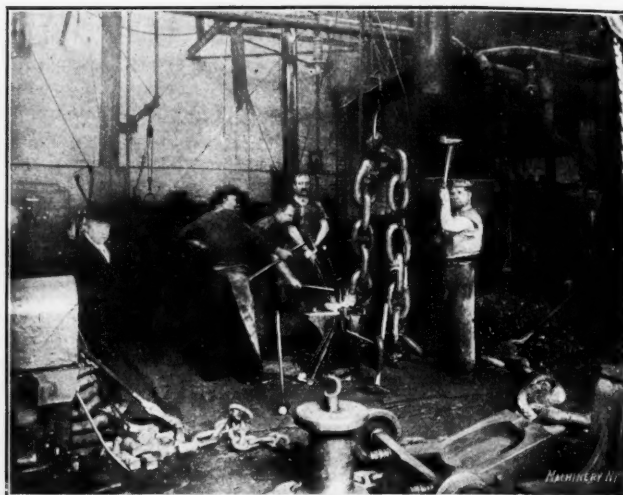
The Chain Gang at Work Welding a Link
